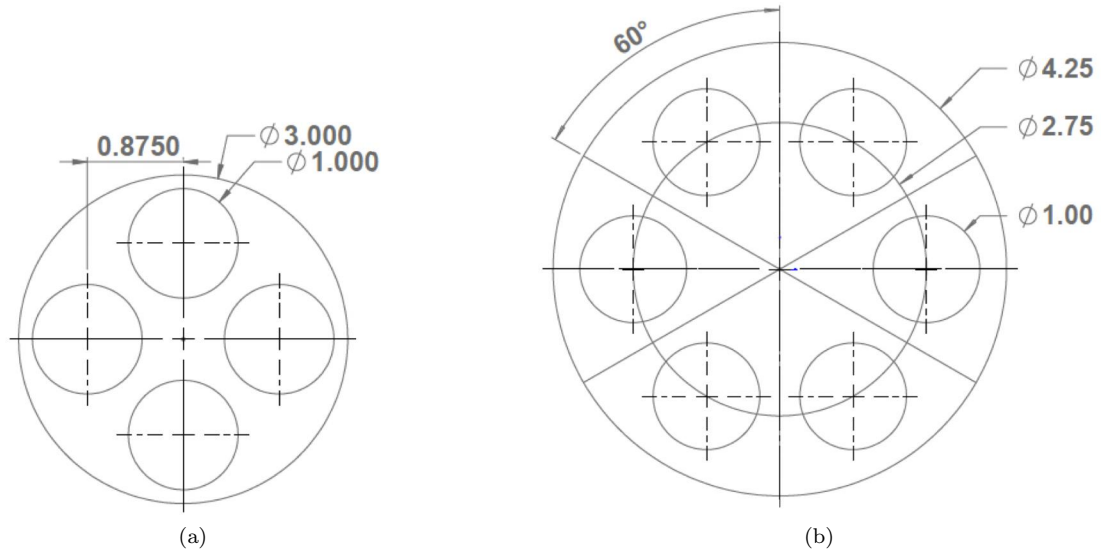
An axial view of where deep roll samples (Figure 3.7) were machined out of the as received bars. All mechanical test samples were machined from the same radius as the deep roll samples. C38M was received in 7.62 cm (3 in) bars (a) and C38N2 was received as 10.8 cm (4.25 in) bars (b). (All units are shown in inches)
